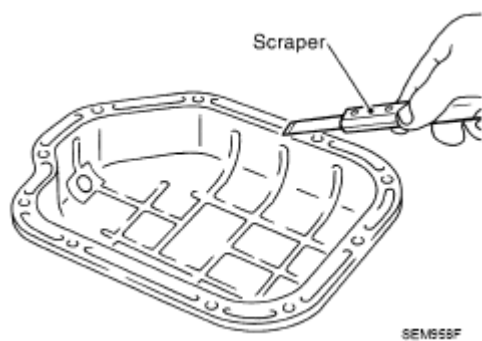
Removing Old Liquid Gasket From Mating Surfaces Of Oil Pan (Upper)
